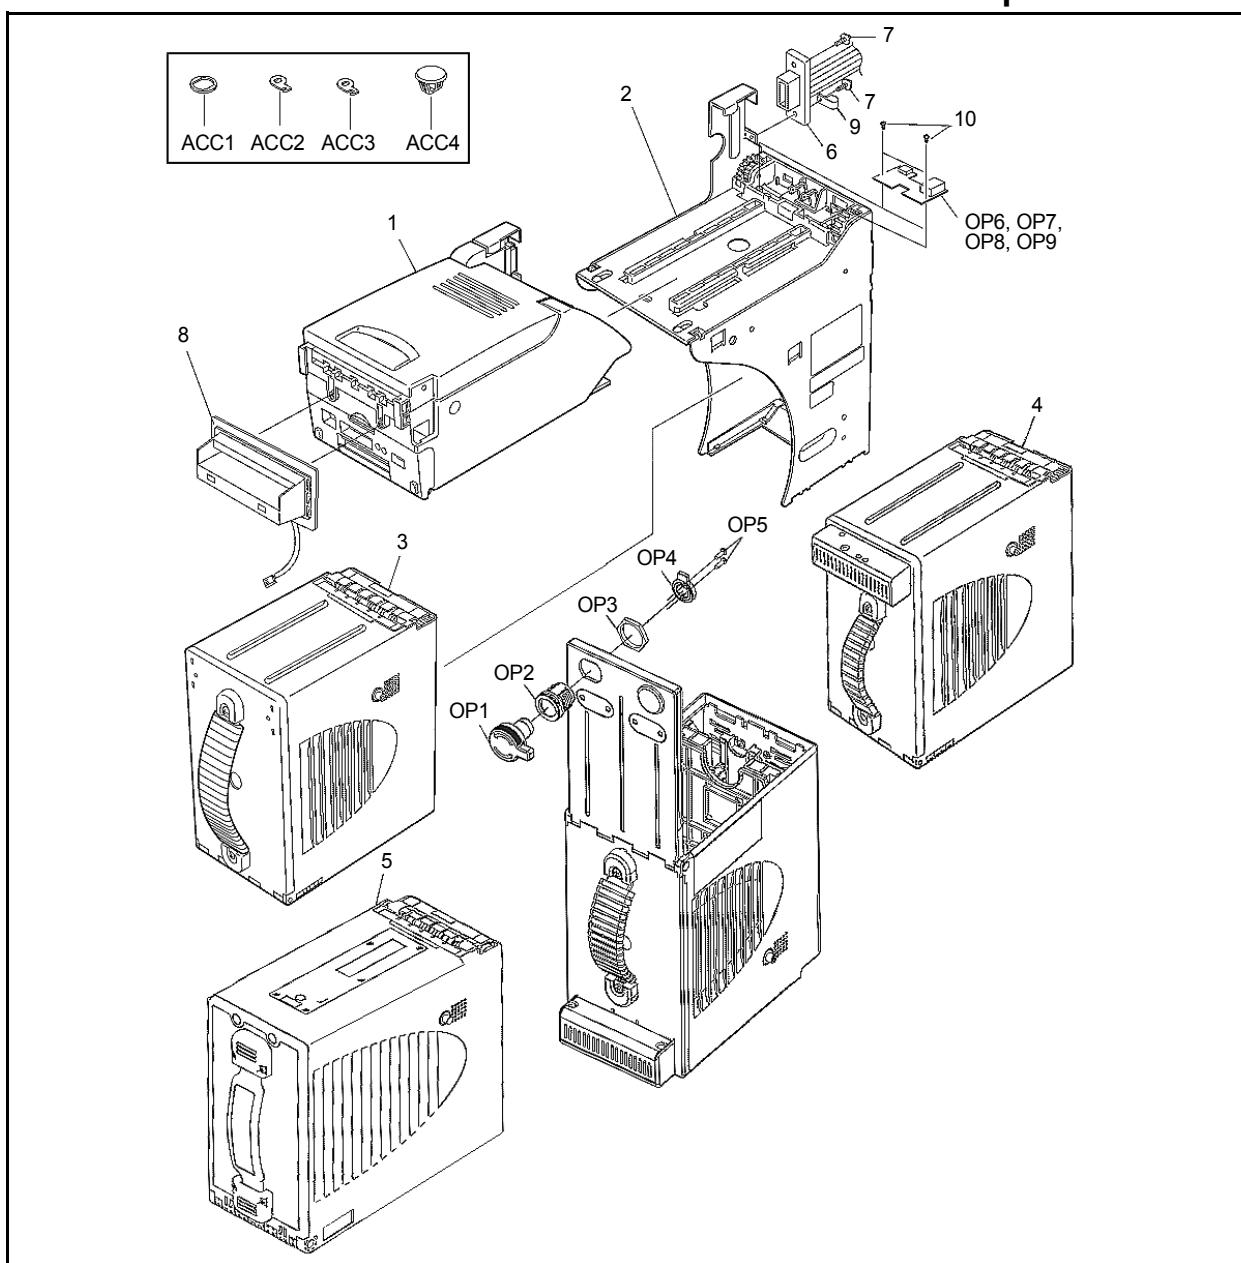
Entire UBA-10/11/12-SS & 14/24/25-SS/SU Units, Accessory & Optional Part Exploded Views
